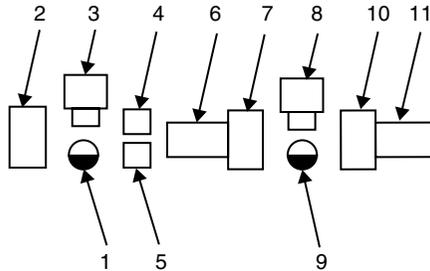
Planning of working places for operation of welding brackets and handles to the neck. 1 — Welder while welding brackets; 2 — bin with neck; 3 — welding apparatus; 4 — bin with rear brackets; 5 — bin with front brackets; 6 — conveyer's inclined plane; 7 — bin filled with necks having welder brackets; 8 — welding apparatus; 9 — welder while welding the handles; 10 — bin with handles; 11 — conveyer's inclined plane.
